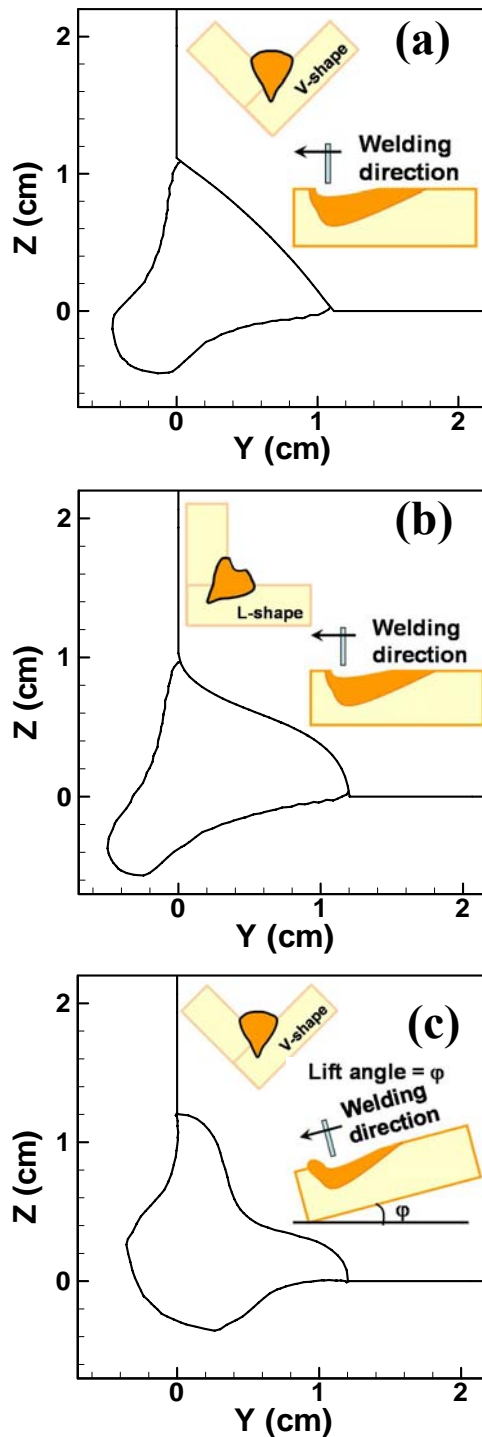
Calculated reinforced weld bead profile during (a) horizontal welding of V-shape; (b) horizontal welding of L-shape joints and (c) downhill welding of V-shape joint. During downhill welding, the workpiece was lifted from behind the electrode at an angle of 30° . Welding conditions are same as those given in case # 4 (table 3-3).
